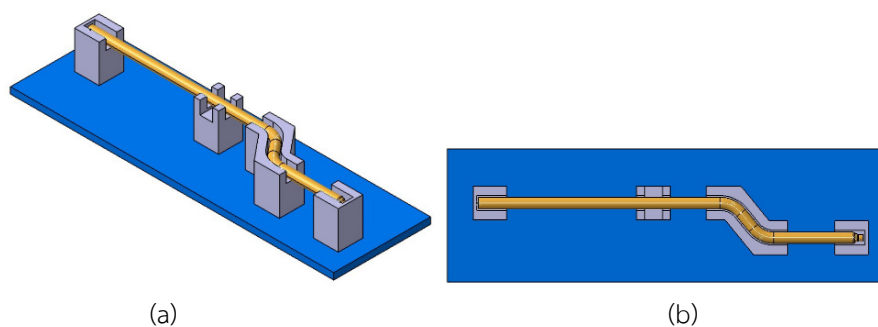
Designing inspection equipment for truck components (a: Isometric view, b: Top view)
